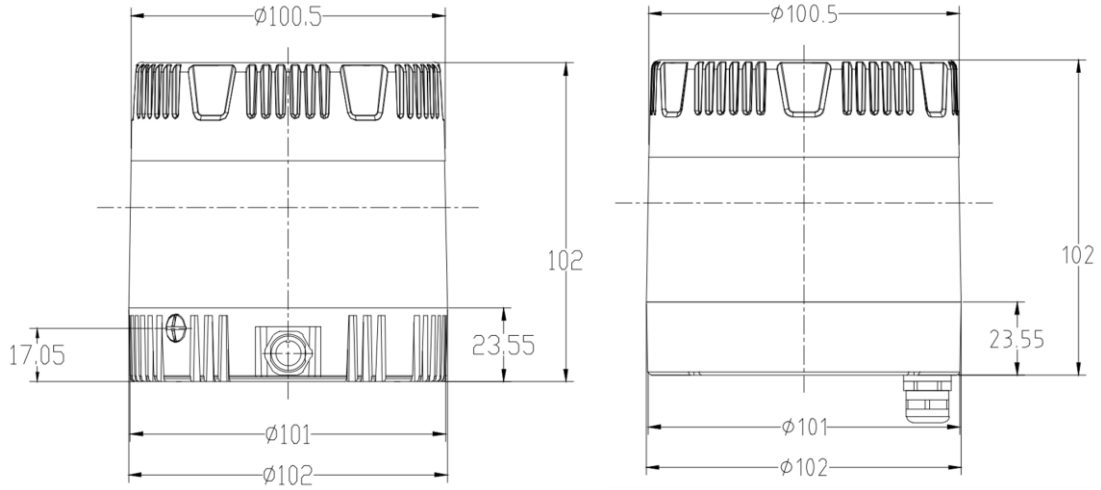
C32W Dimensions (unit: mm) (left: side; right: bottom)
